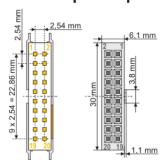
Dimensions of the 20-pin contact strip of the terminal and the matching spring contact strip; for connections see Contact assignment
